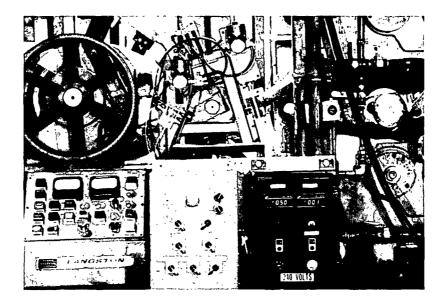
Experimental Glue Machine in Place Between Standard Glue Machine and Double Backer
